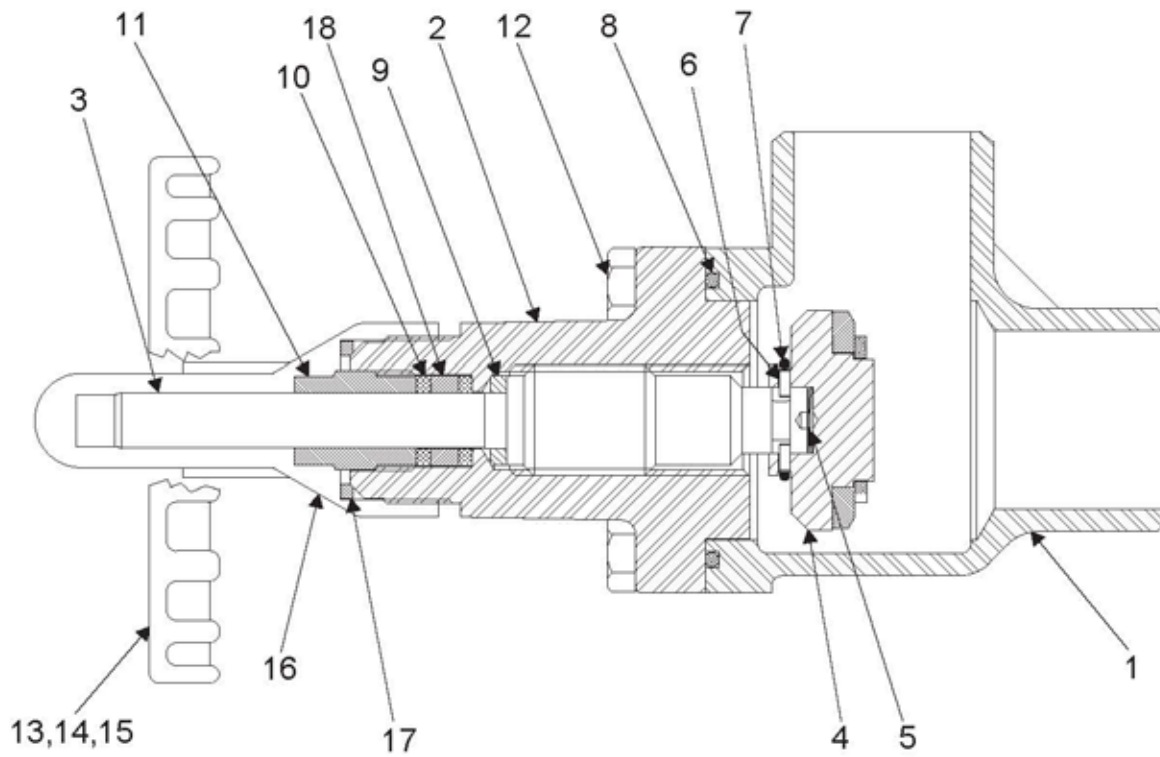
Angle Shutoff Valve Parts, 3" and 4" (Frick®)
